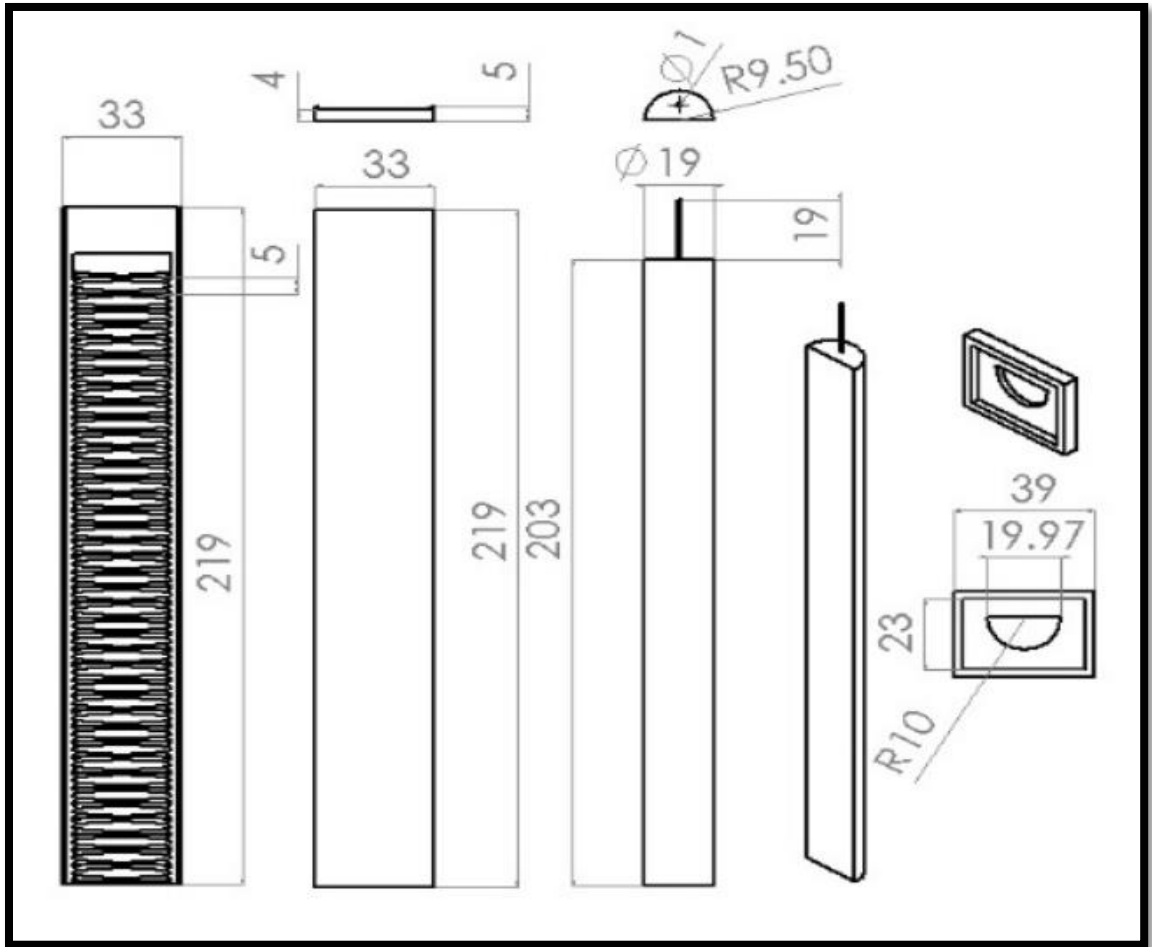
5-mm winding spacing Fiber-Reinforced actuator inner mold design and dimensions.
